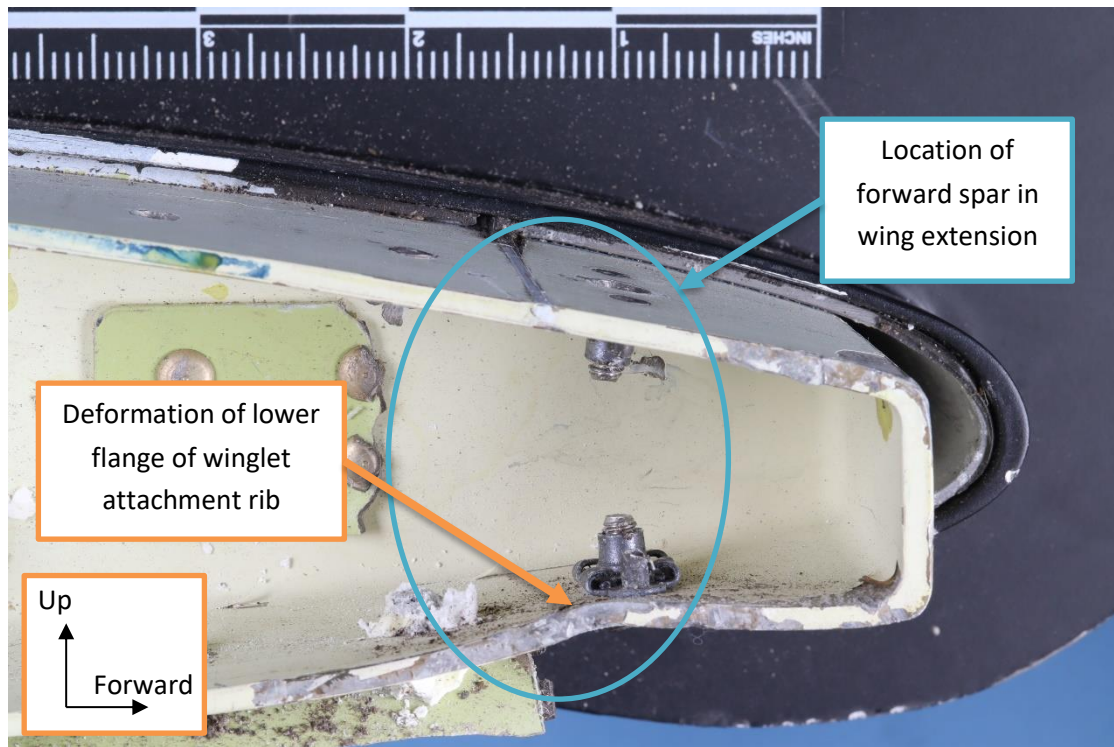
Winglet attachment rib lower flange dent (view looking outboard)
